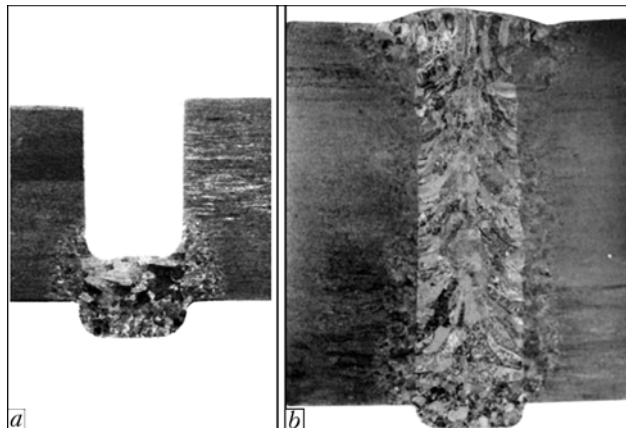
Macrosection of the root pass (a) and welded joint on commercial titanium VT1-0 40 mm thick (b)
